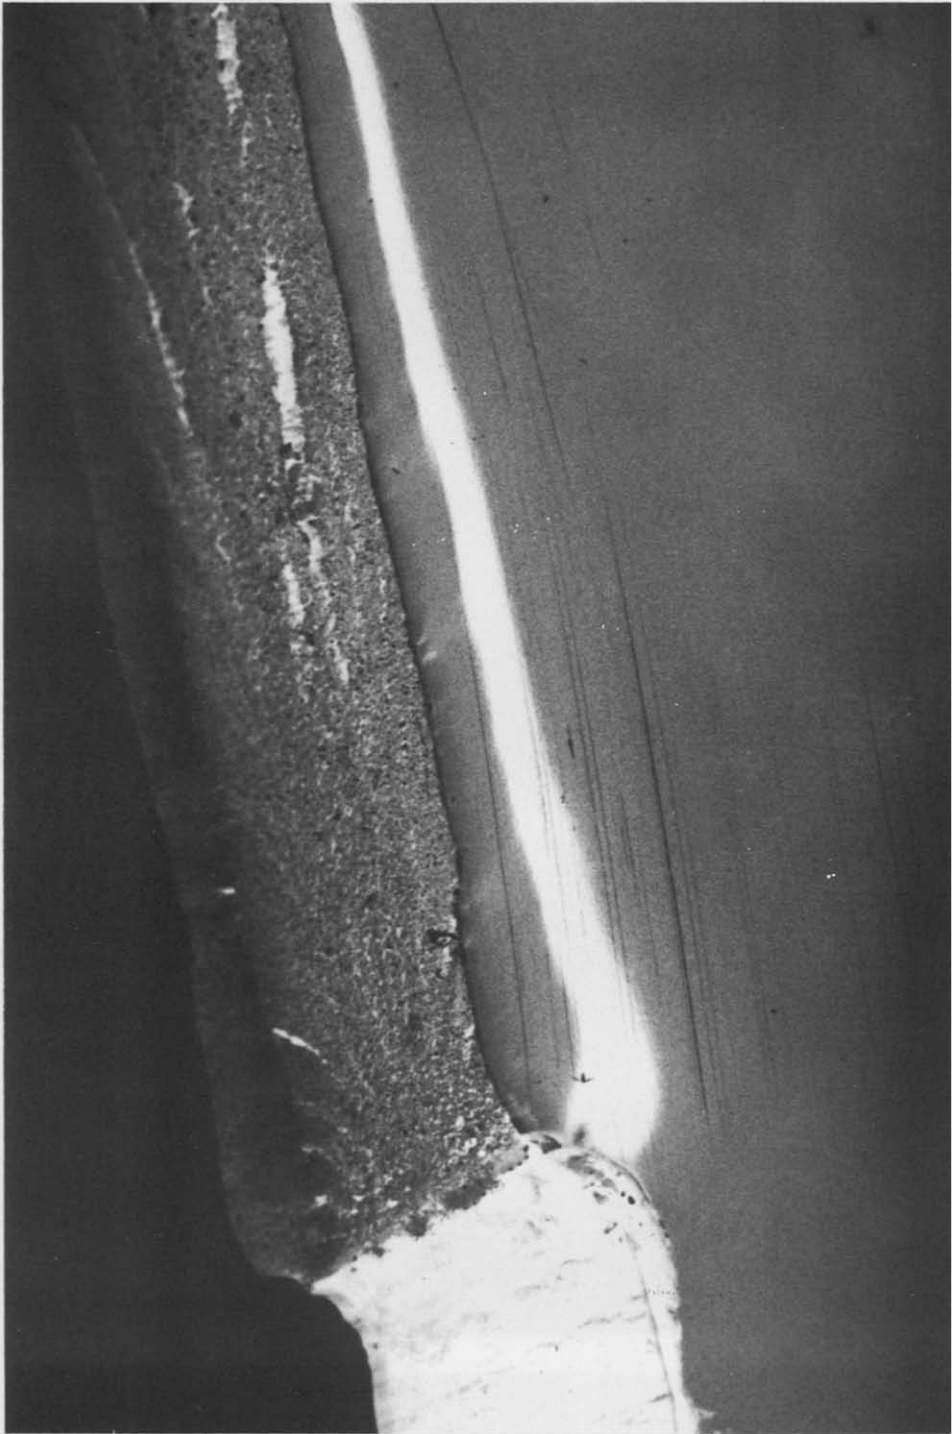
Photograph of fracture surface and shear lips.
